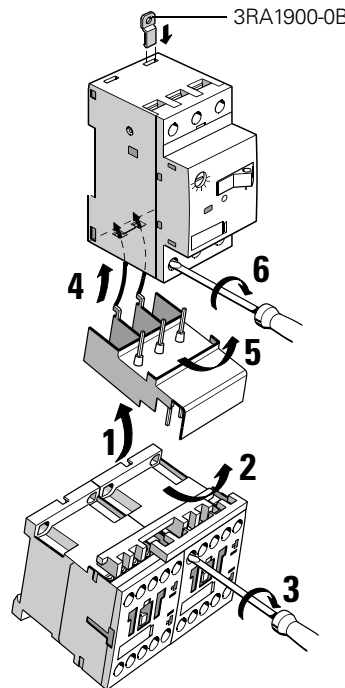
Screw-on attachment, fuseless load feeder (frame size S00)
